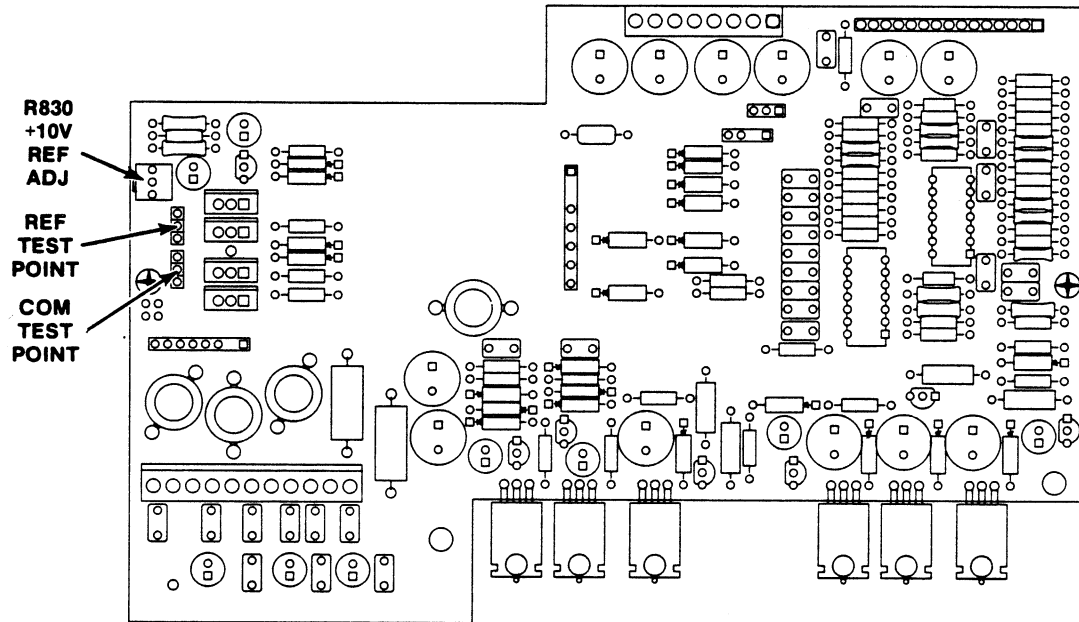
A4 Regulator Board Test Point and Adjustment Locations
